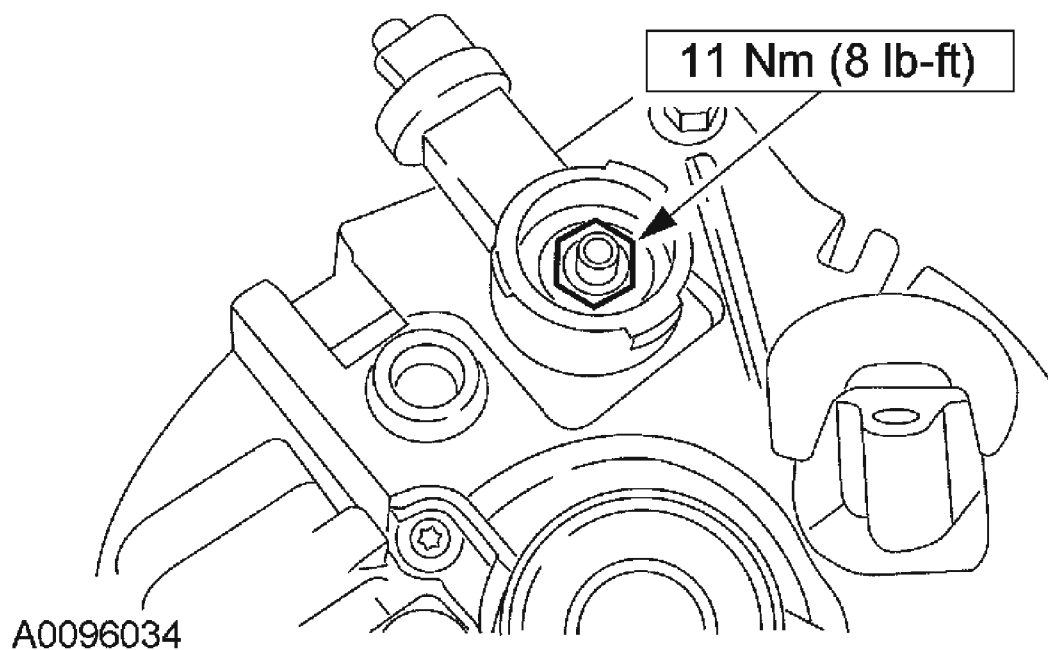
Removing Radial Adapter (B+ Connection Extension)
